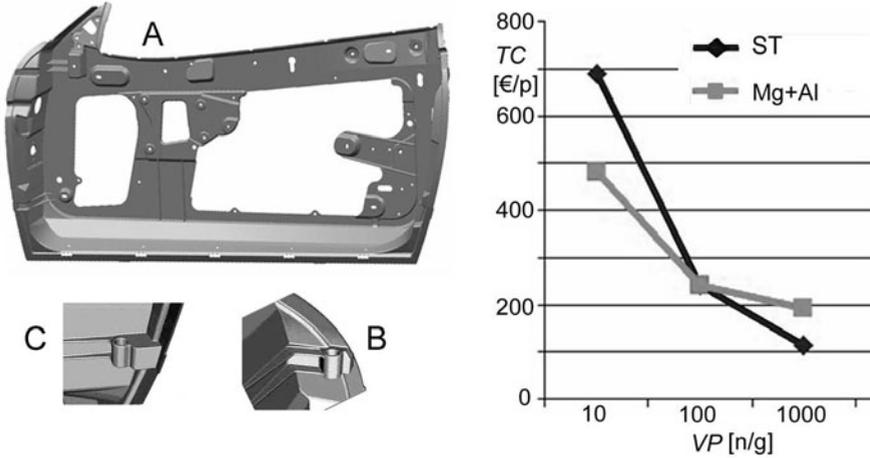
Example of cast magnesium door inner panel (A) of a spider and details of the upper (B) and lower (C) hinge, integrated in the cast piece. On the right, a comparison between overall cost TC of a traditional steel door (ST) and a hybrid door (magnesium inner and aluminum outer panel), with reference to daily production rate VP .
